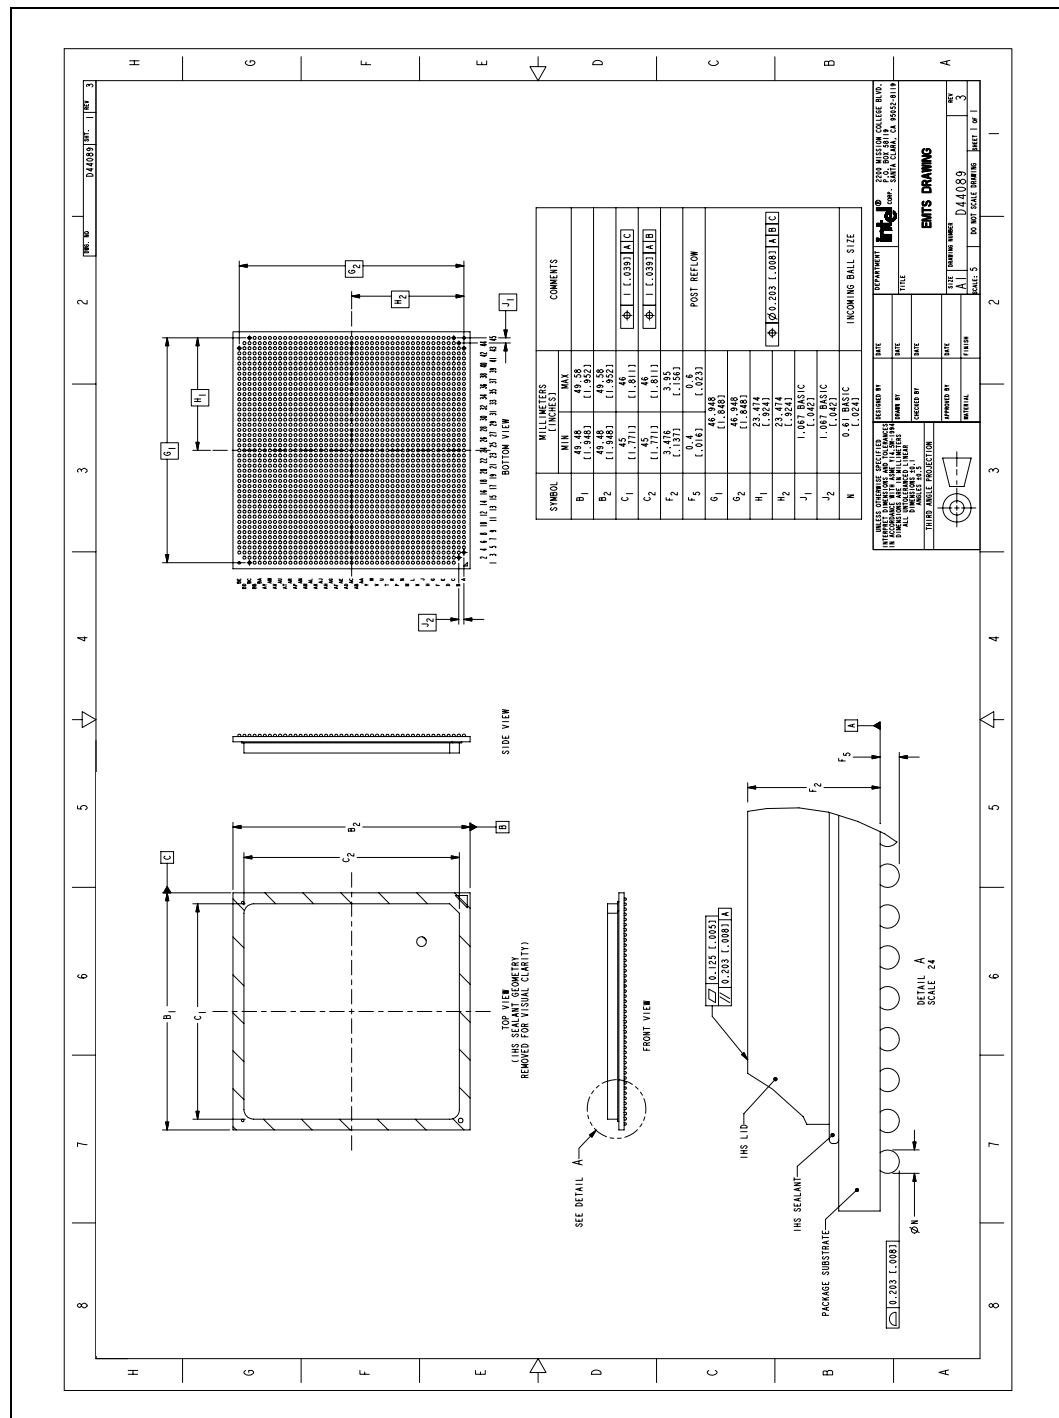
Intel 7300 Chipset Memory Controller Hub (MCH) Package Drawing
